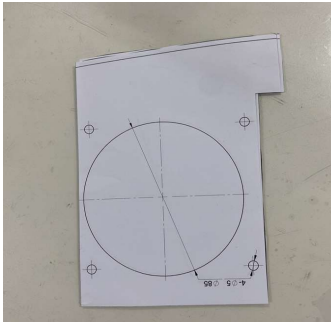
Drill a hole as cutting guide with $\Phi 86$ hole cutter
